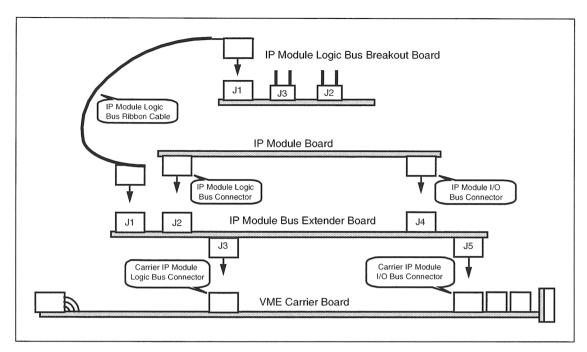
IPLBB/IPLBE Assembly Diagram for a VME Carrier Board
